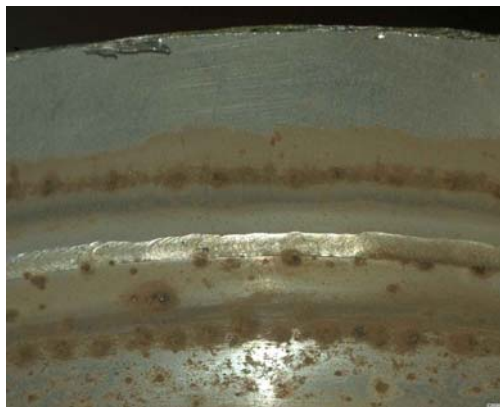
Pitting corrosion formed on the interior surface of a container filled with a stabilized material of 80% PuO₂ and 20% salt with 0.2wt% water. The weld joins 316L (above) to 304L (below).
